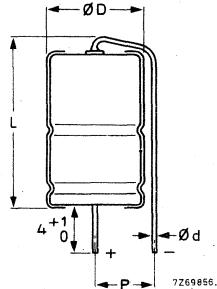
Style 3; see Table 1c for dimensions d, D, L and P.
